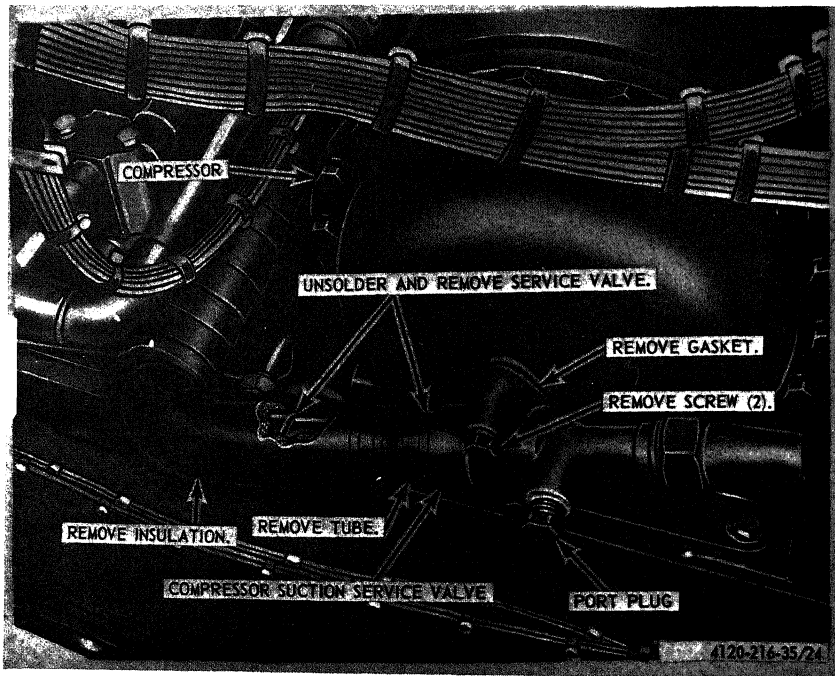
Compressor suction service valve and tube, removal and installation.
